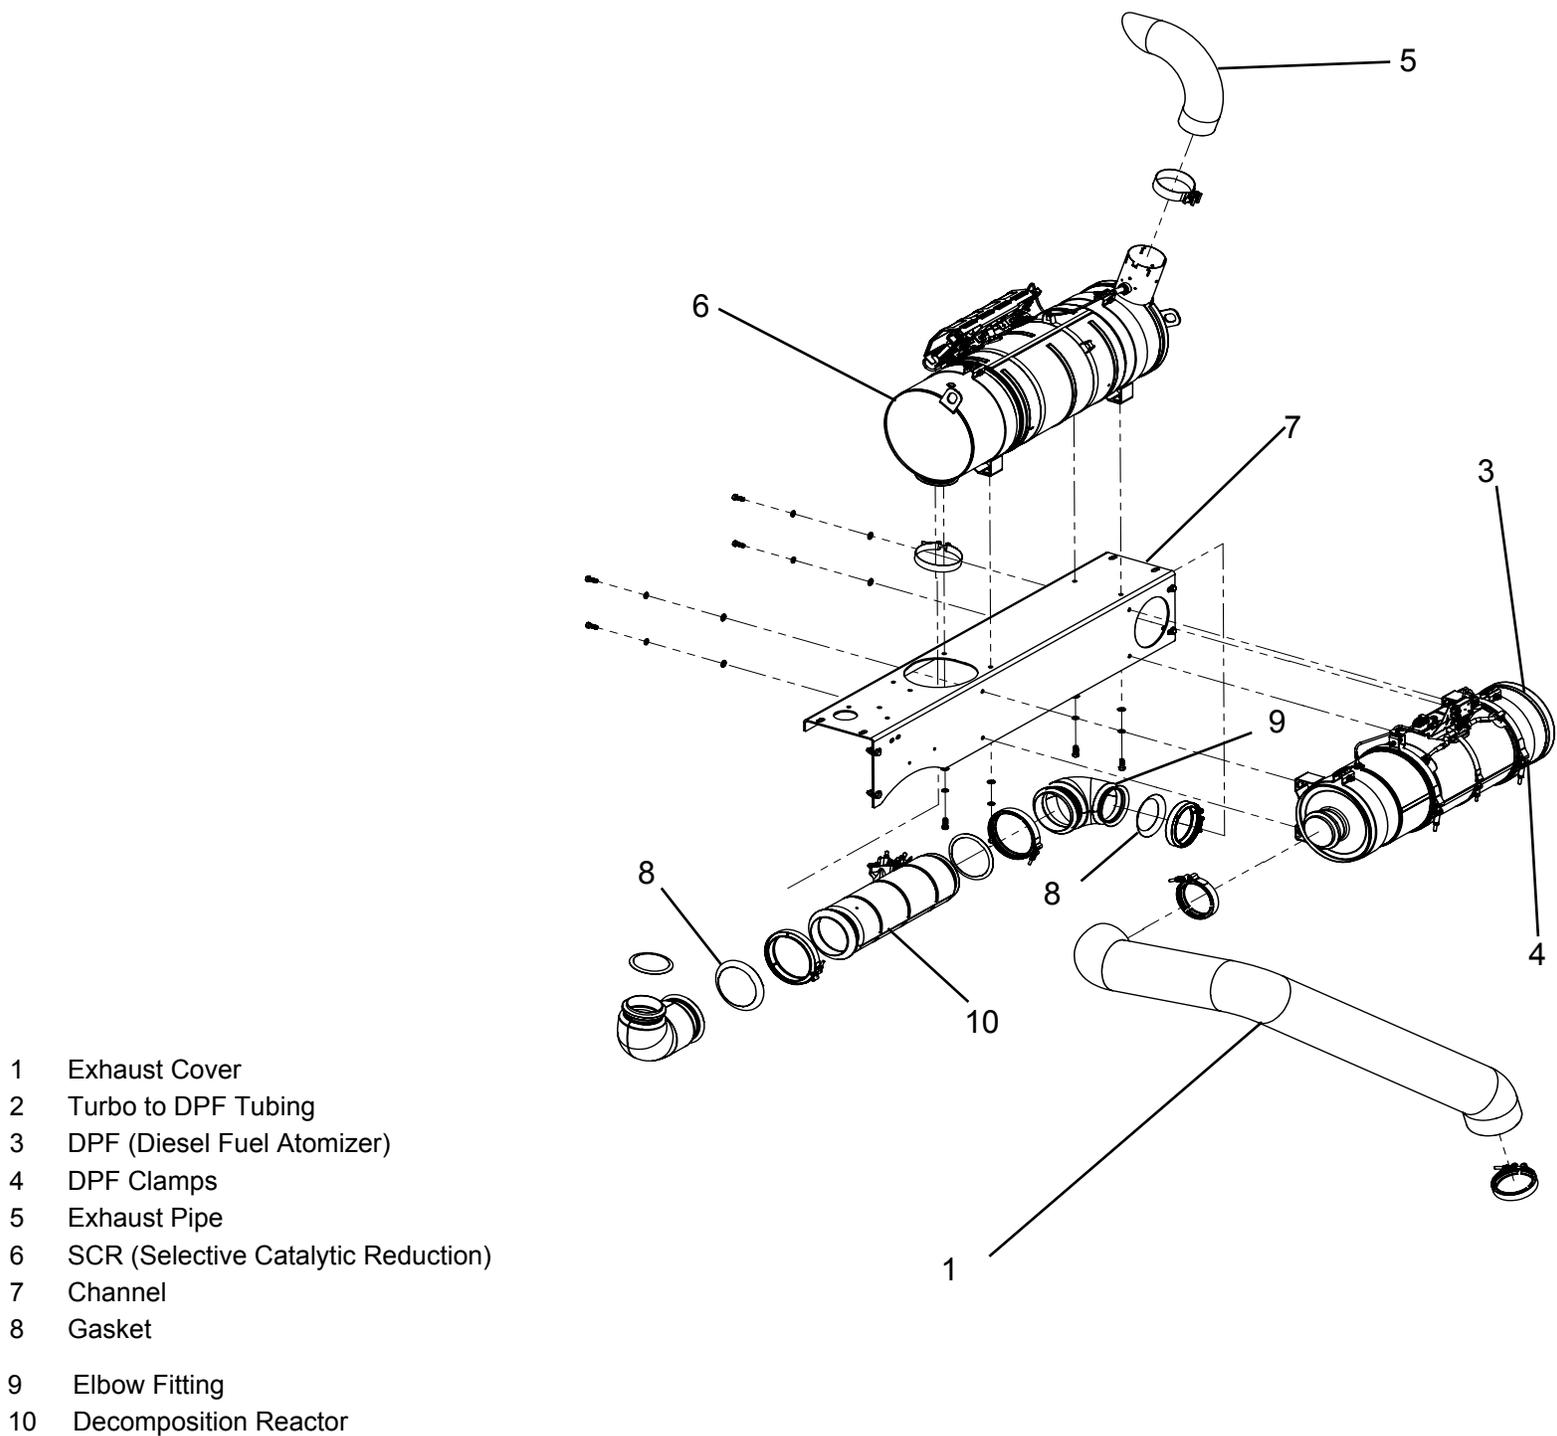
33 A *The Aftertreatment system is located at the rear above the engine on top of the Charge Air Cooler.
